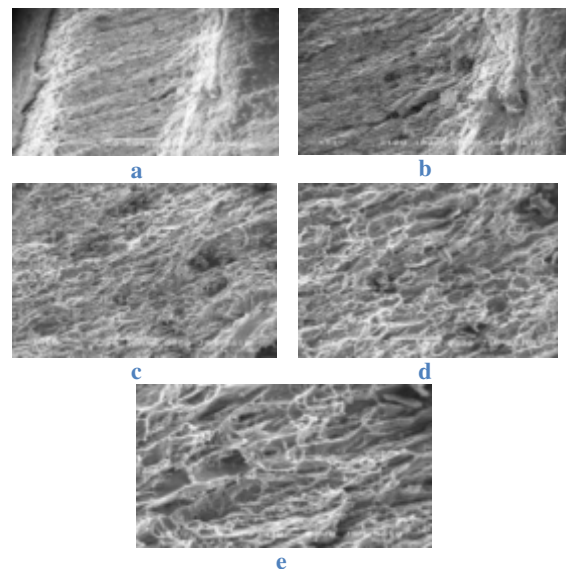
Fractograph of weld sample prepared at 1070 rpm tool rotation speed and 120 mm/min welding speed a. 50x b.100x c,250x, d. 500x, e. 1000x magnification
